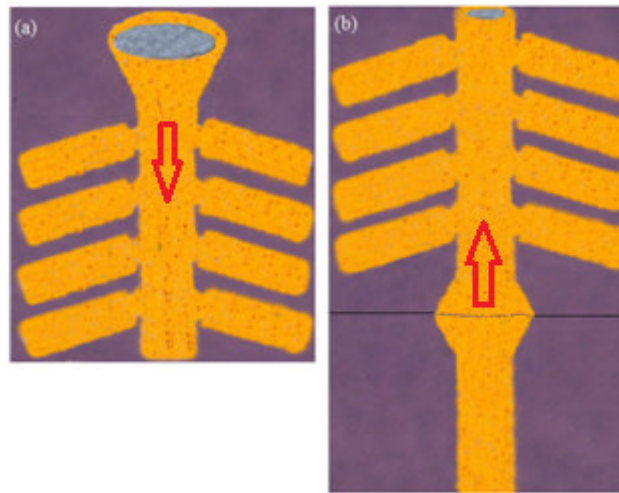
Investment shell moulds: (a) gravity poured and (b) counter-gravity poured.
